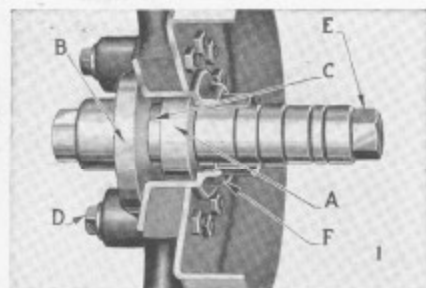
Illustration above Shows Method of Mounting Wheels with Radial Ball Bearings.
